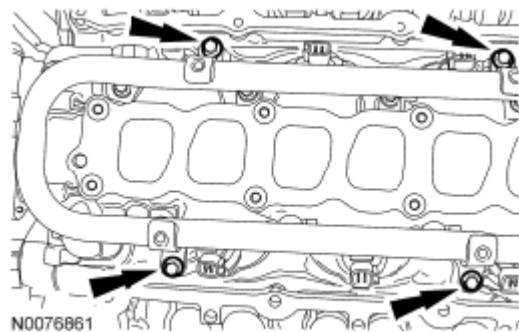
Locating Fuel Rail & Injectors Assembly Bolts
